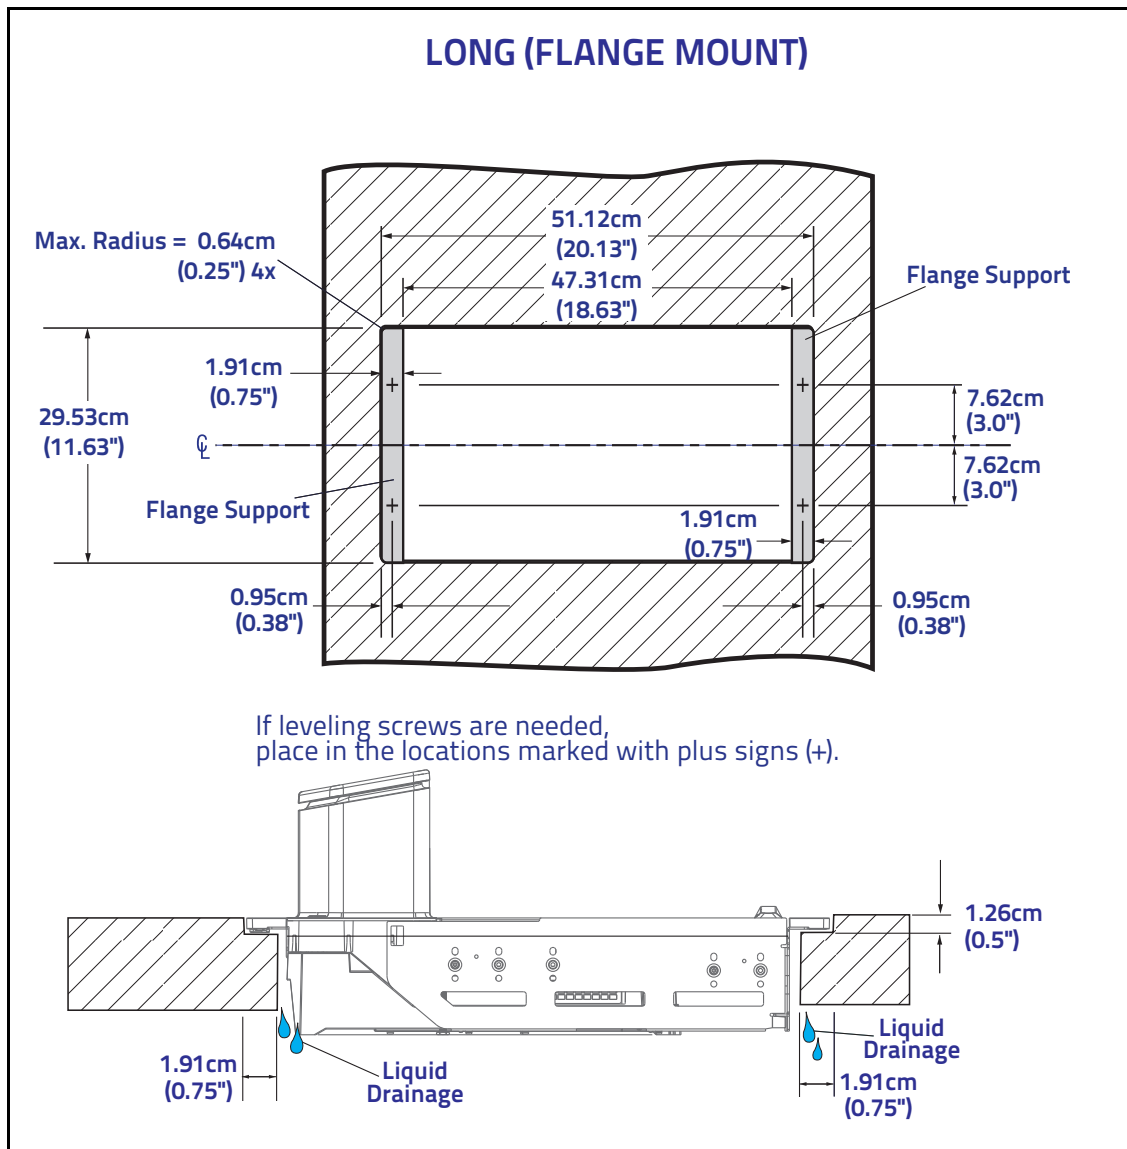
Counter Cutout and Scanner Support Dimensions - Long (Flange Mount)
